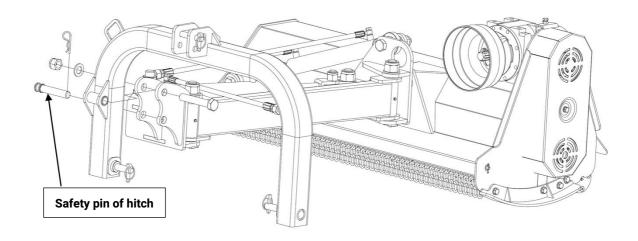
Installing Hitch Tube Weldment and Fittings
